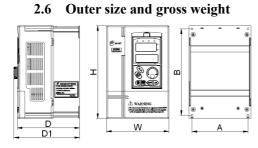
T0022G/C~EDS2000-4T0110P/C outer dimension
